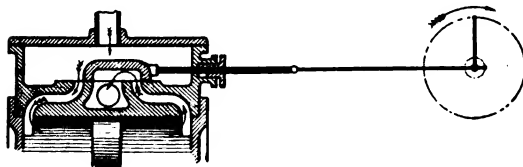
Elementary Slide Valve—Inlet and Exhaust Ports Fully Opened—Piston in Mid-Position
